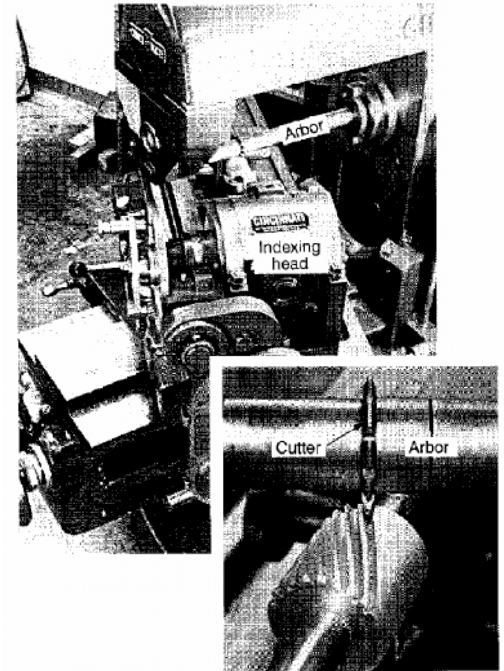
Form cutting a helical gear on a universal milling machine using an indexing head.
